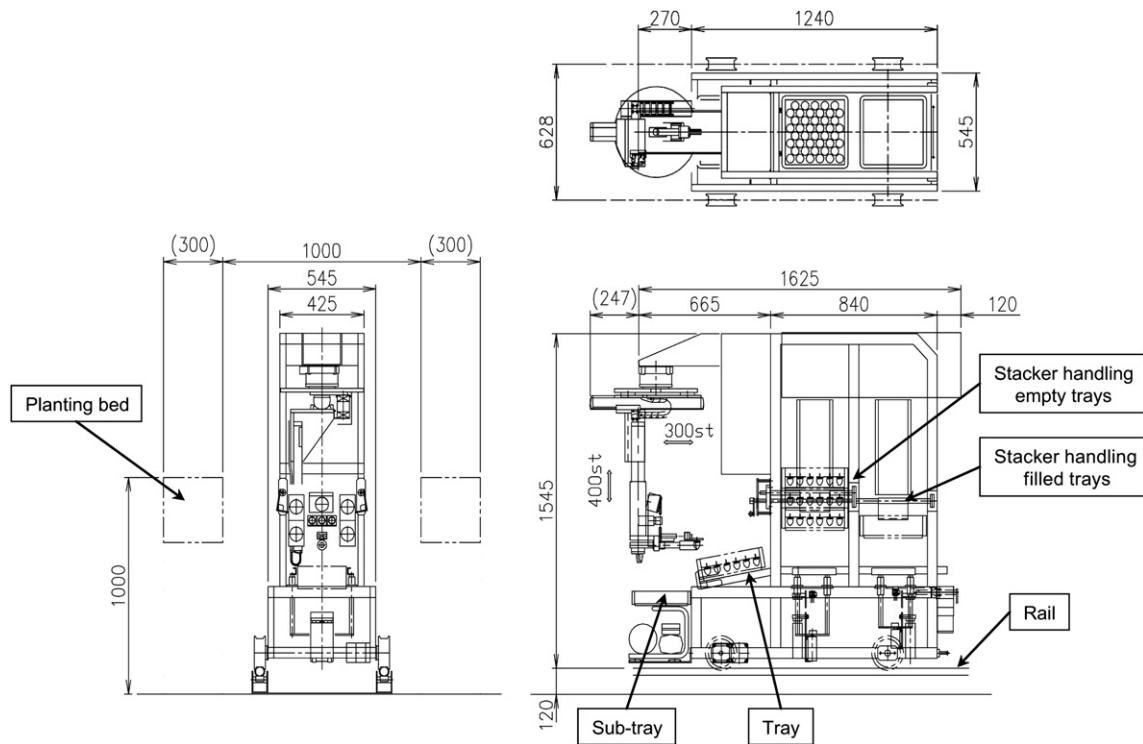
Schematic drawing of the strawberry-harvesting robot; all dimensions in millimetres.
